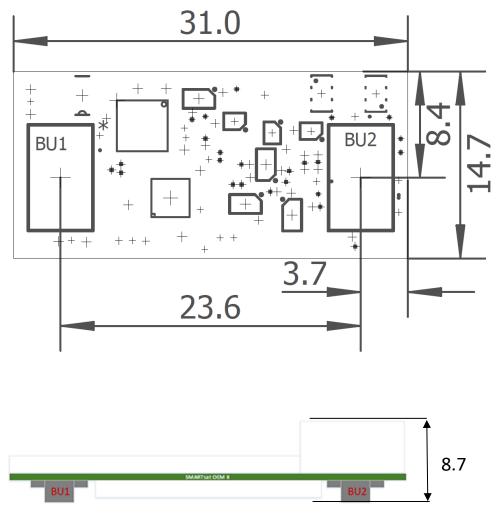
SMARTsat® OEM II Board Physical Dimensions (in mm)
